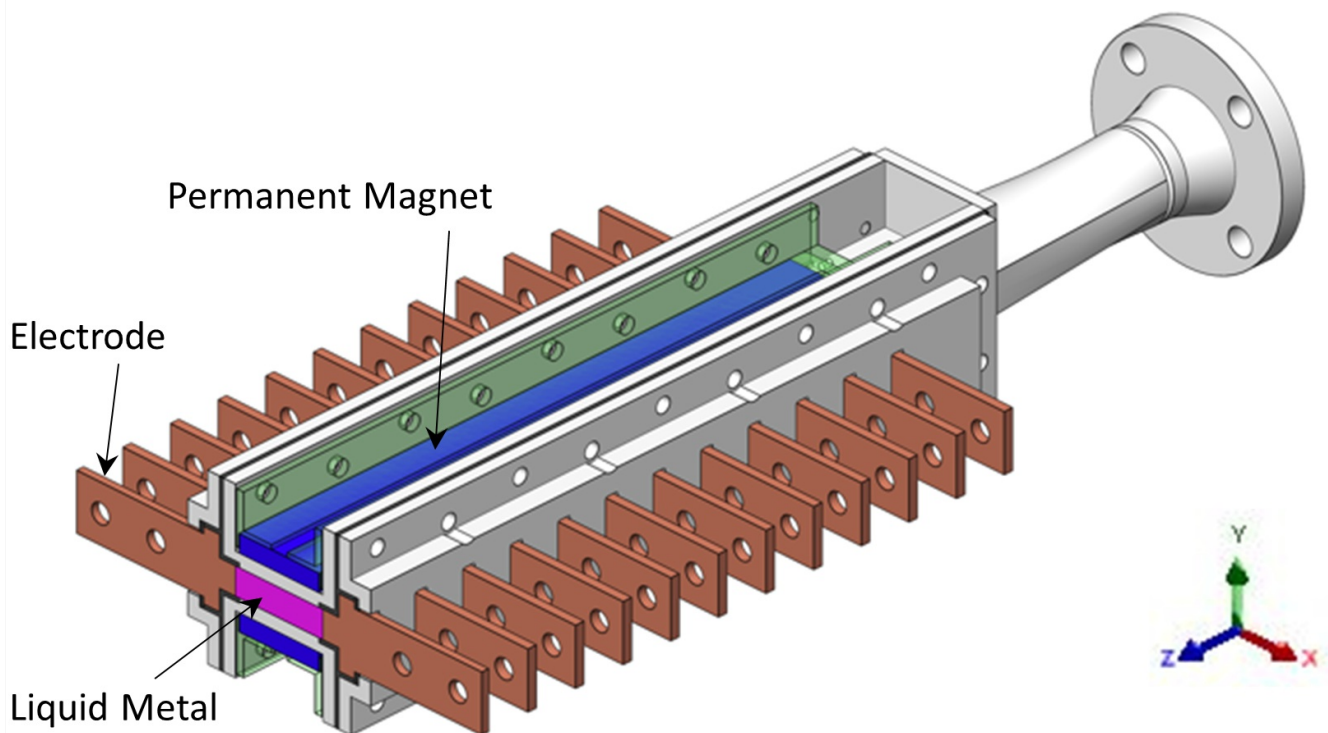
MHD generator with cross-section cut-out view along the x-y plane
